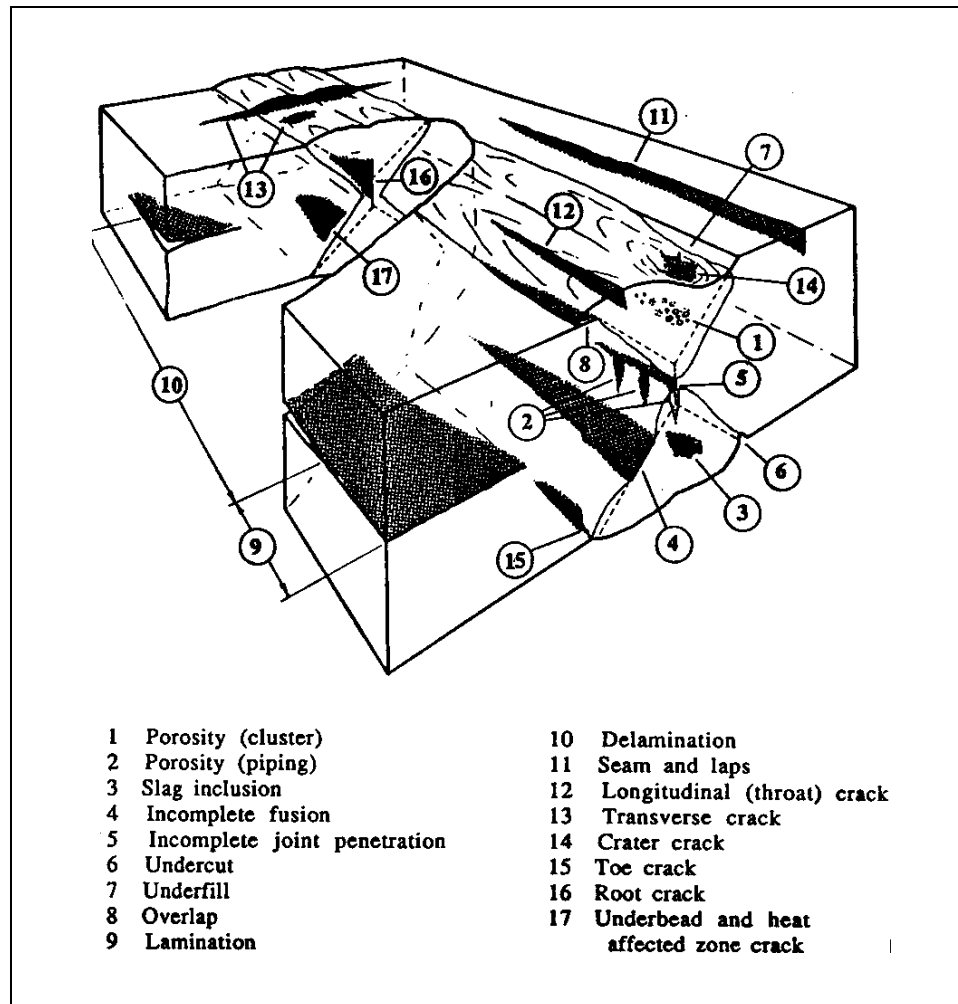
Weld discontinuities (ANSI/AWS B1.10; copyright permission granted by American Welding Society)
